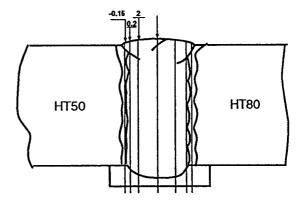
Hardness measurement directions in WM of dissimilar narrow gap weld joint
